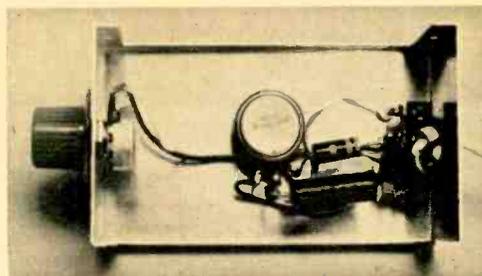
Inside of remote-control unit. Box may seem large for number of components, but this is because we installed a large, easy-to-read dial.
